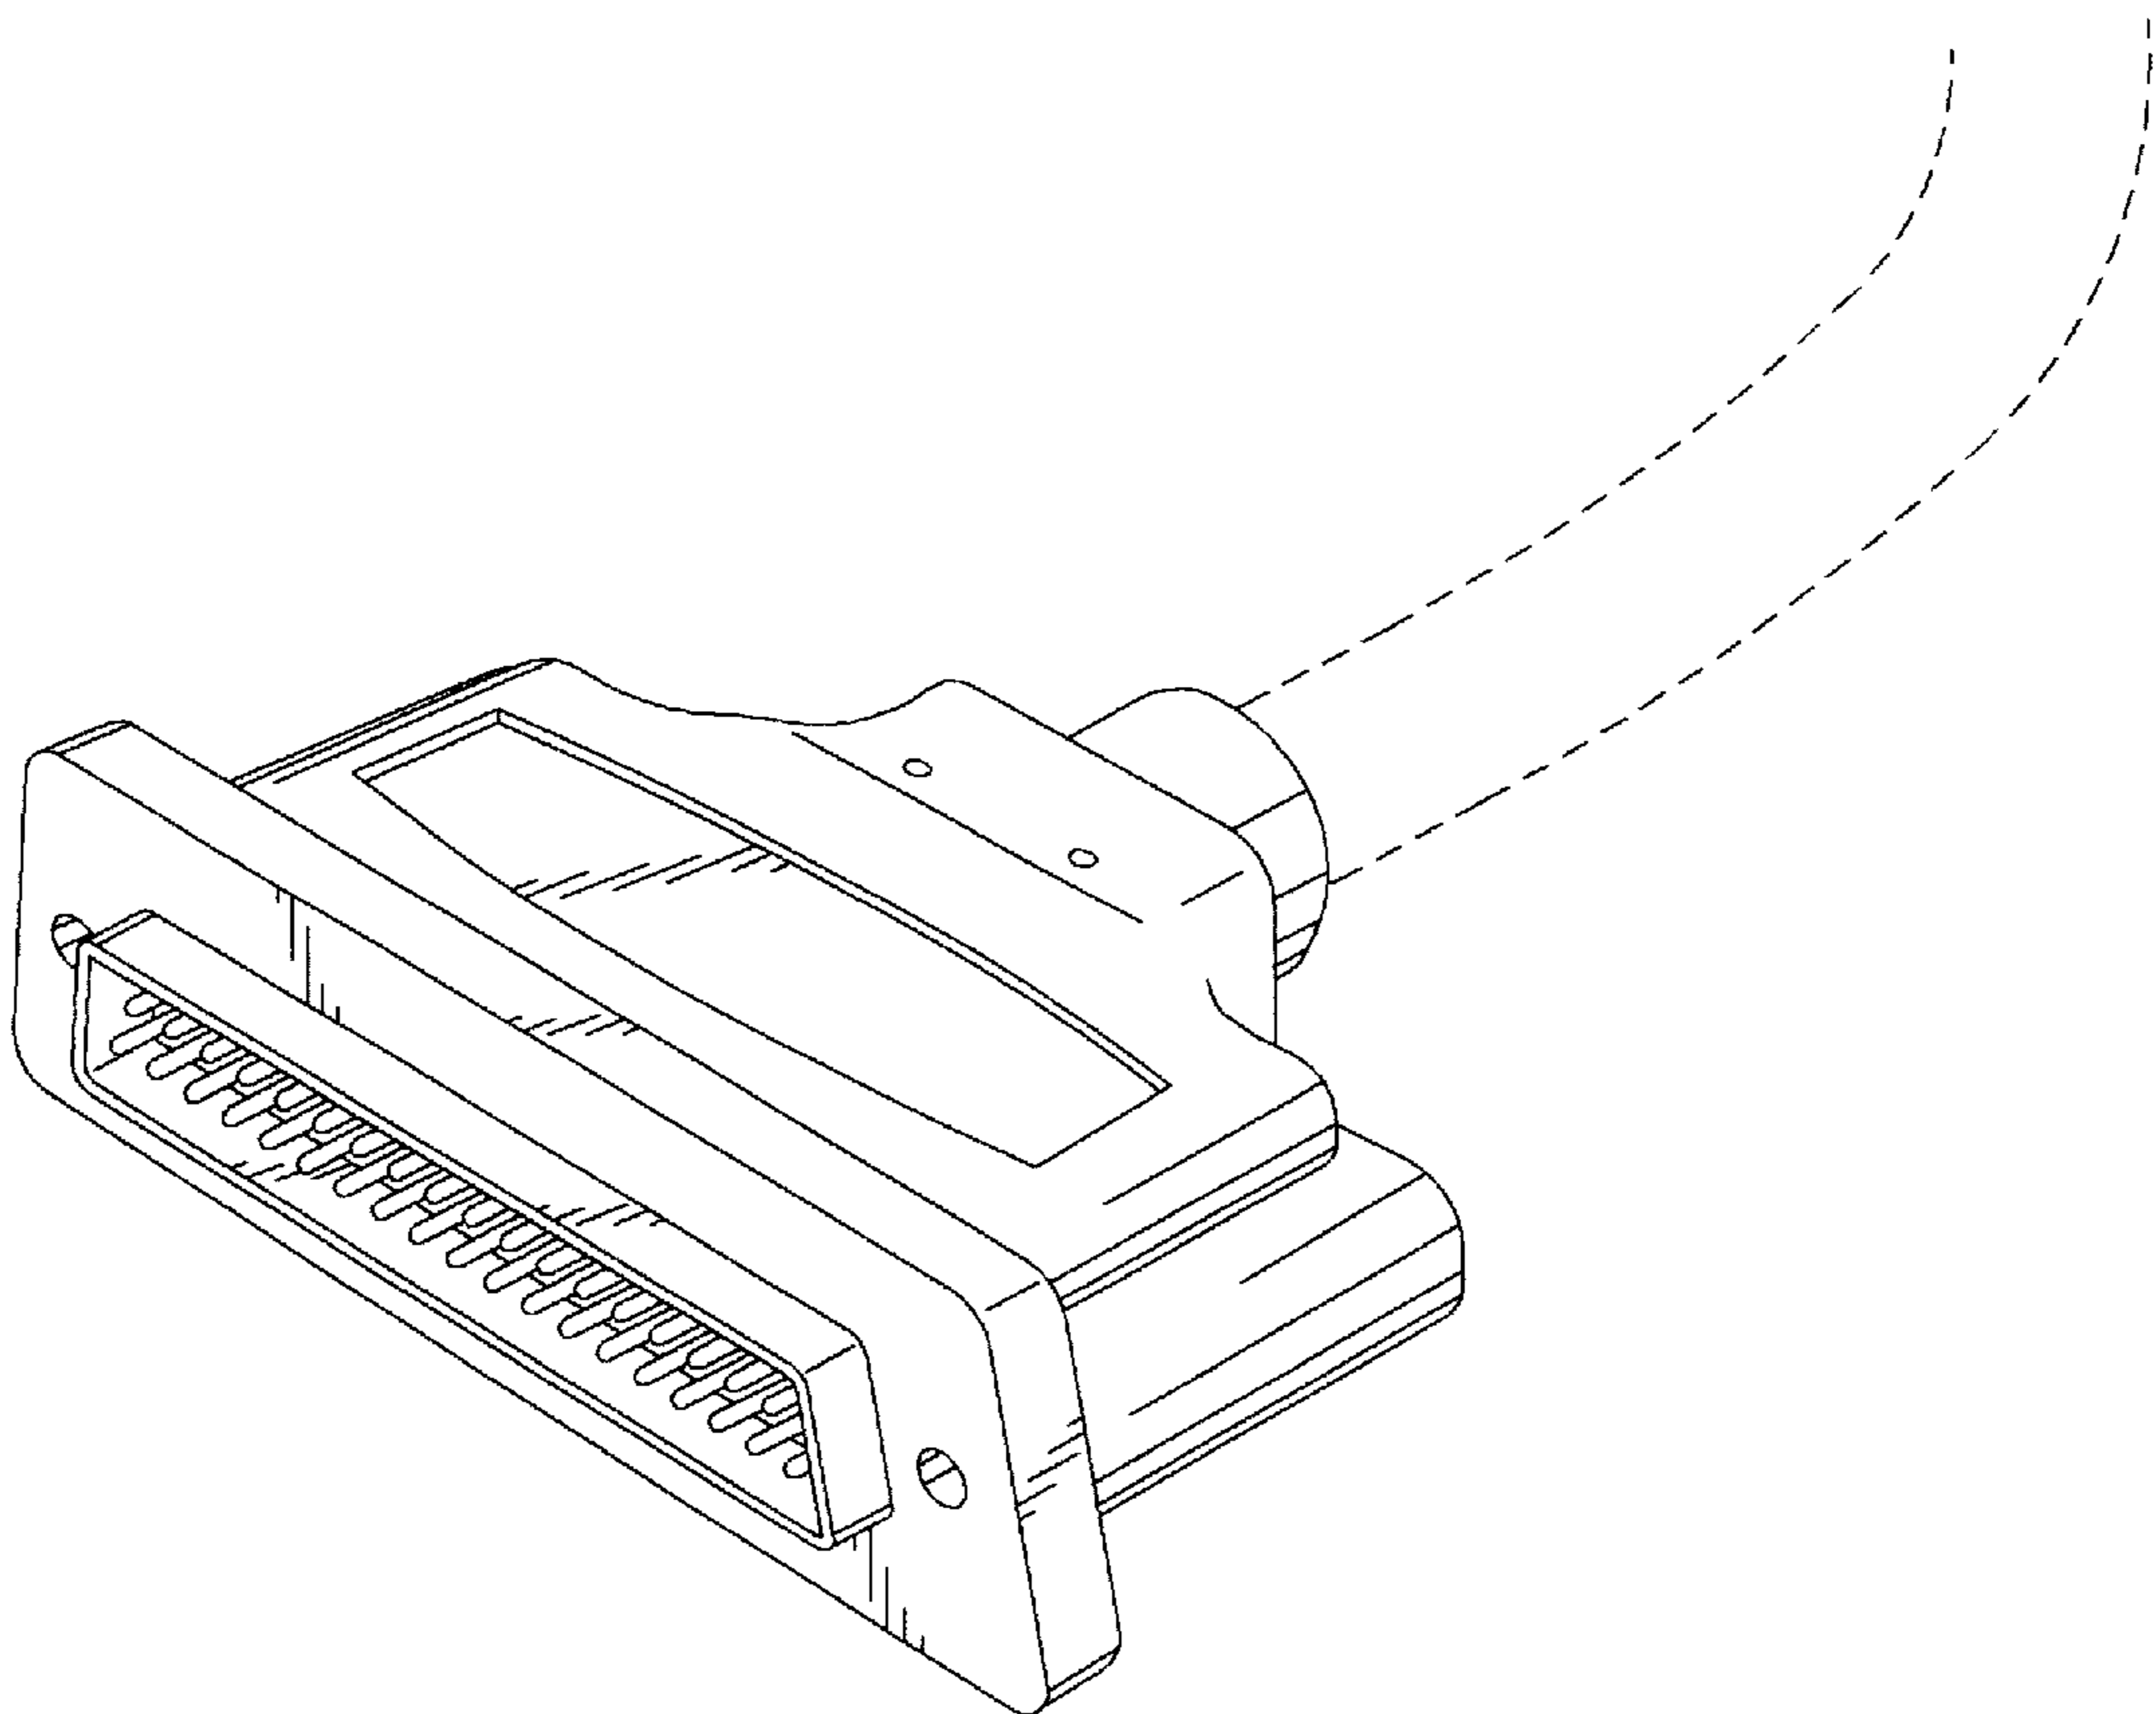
is a perspective view of the electrical signal cable connector shown in FIG. 1, taken from the bottom and rear, with the cable shown in phantom;
